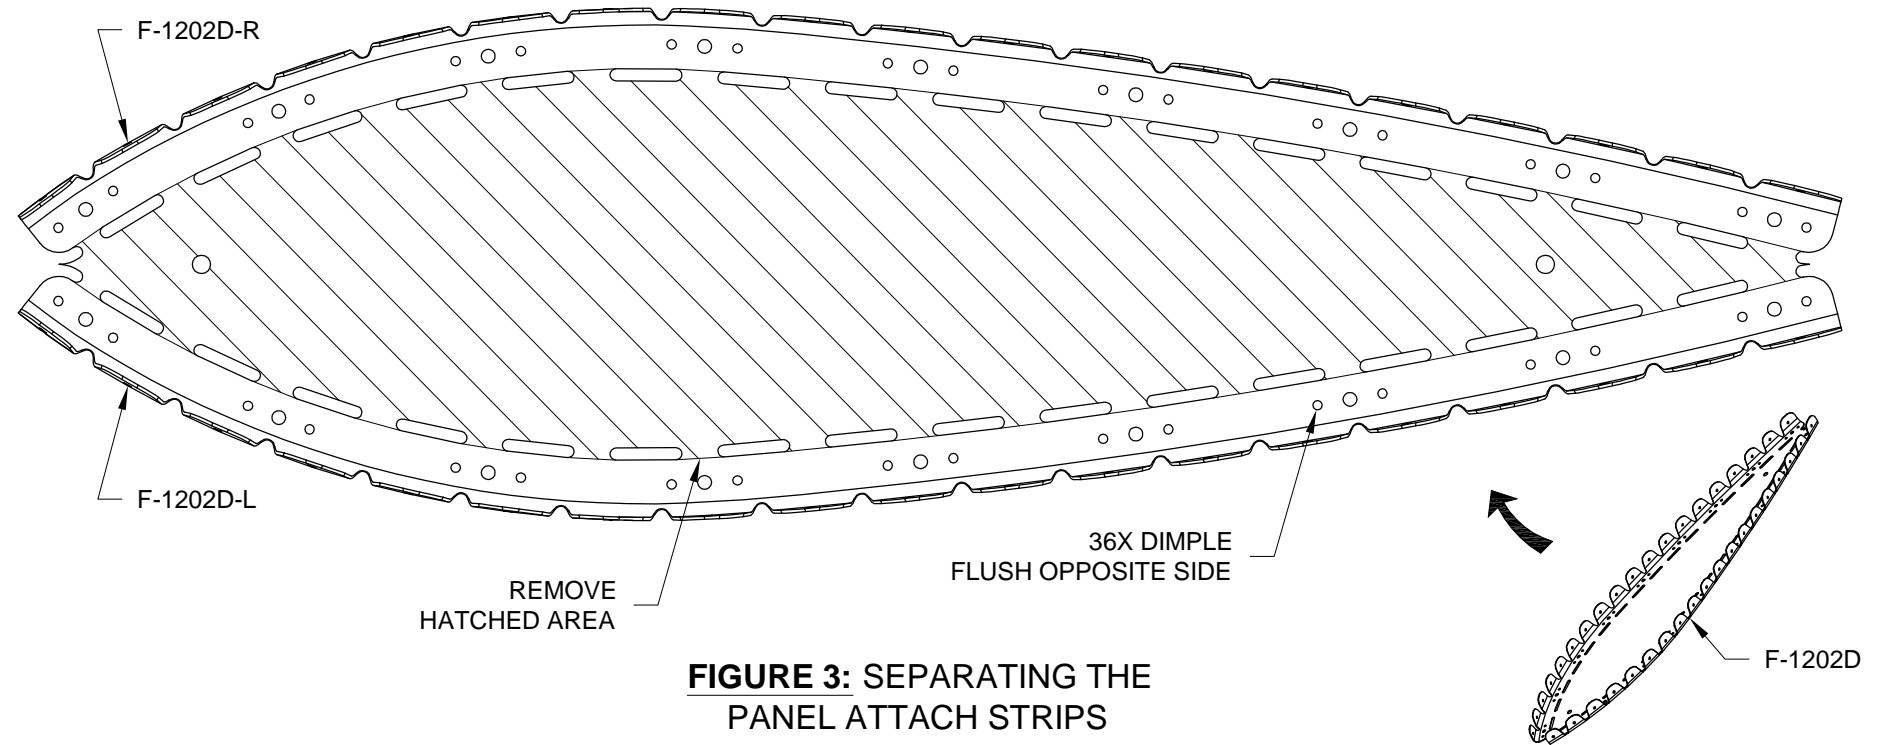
SEPARATING THE PANEL ATTACH STRIPS
